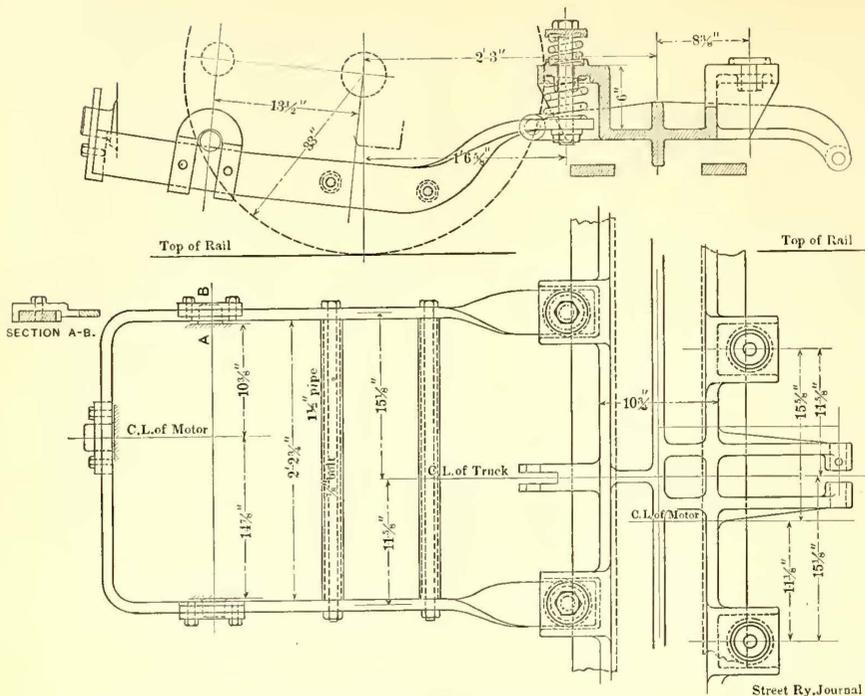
MOTOR SUSPENSION OF DOUBLE TRUCK
